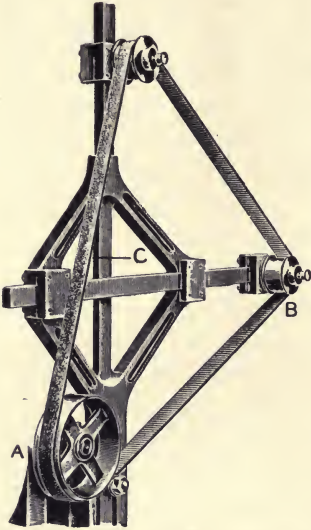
BELT POLISHING MACHINE—LONDON EMERY WORKS CO.
